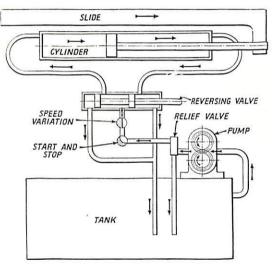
Layout of hydraulic feed system of Churchill grinder after the in-feed is concluded, until the wheel ceases to produce sparks from the work.
